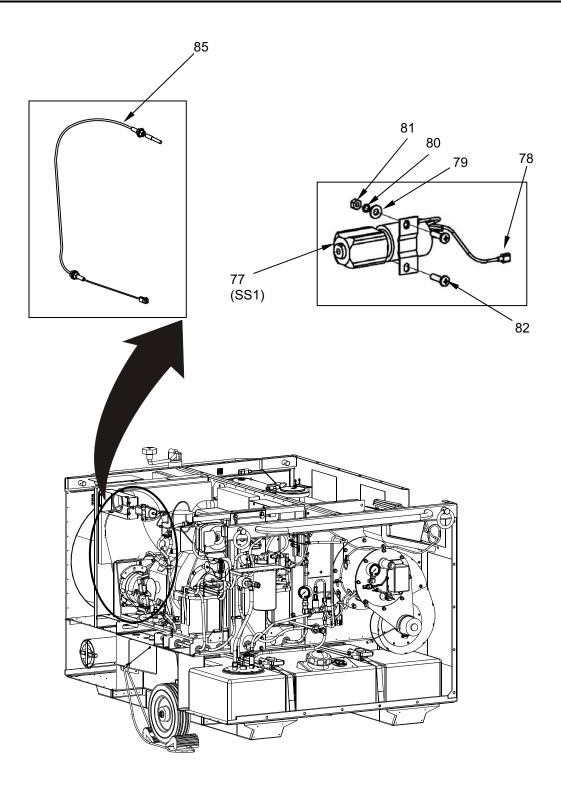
Assembly, Engine System (Engine Stop Solenoid and Cable Detail) (Sheet 3 of 3).
